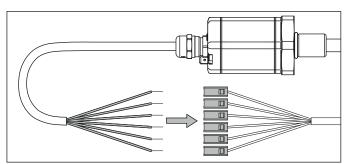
Connection of adapter cable to G-Series V sensor with cable outlet
